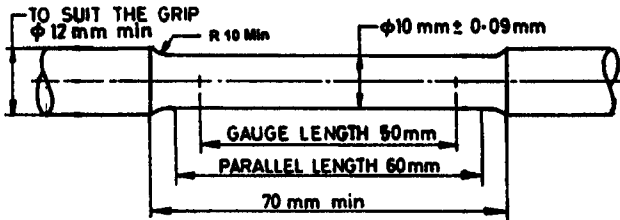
TENSILE TEST PIECE FOR SIZES 4 mm AND ABOVE
